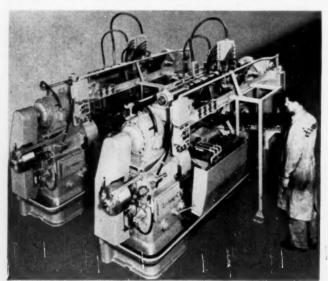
This illustration shows a camshaft - producing installation developed by The Seneca Falls Machine Co., Seneca Falls, N.Y., for handling camshafts of the type shown in Fig. 3.
